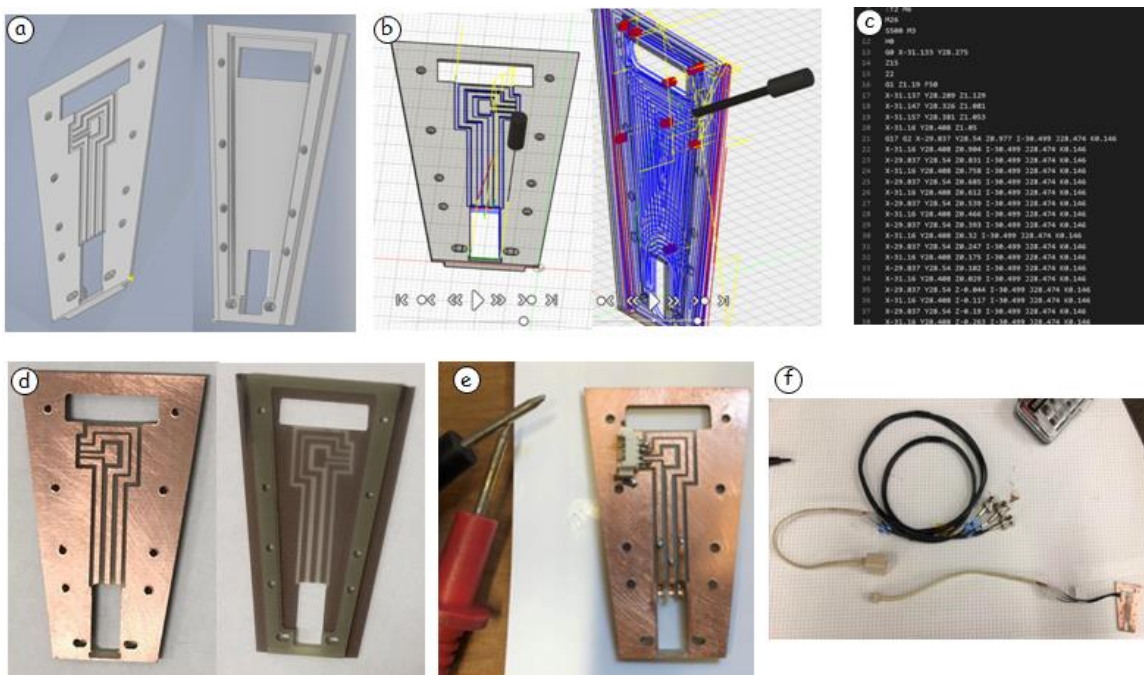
Fabrication process for making PCB. Pictures of a) 3D model of the PC board part b) toolpath for cutting PC board part c) G-code for controlling the CNC machines to cut PC board part d) obtained PC board part e) the PC board part connected with 4-pin connectors and Cu plates f) the PC board connected with the electrical wires attached to the potential stat.
